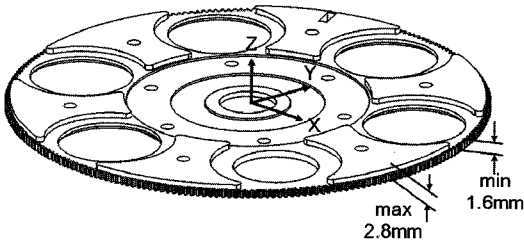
Schematic drawing of main disk gear(#3,#4)
